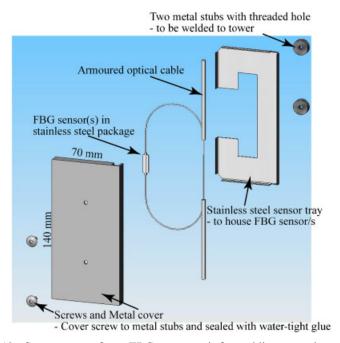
Components of one FBG sensor unit for welding onto the structure.
